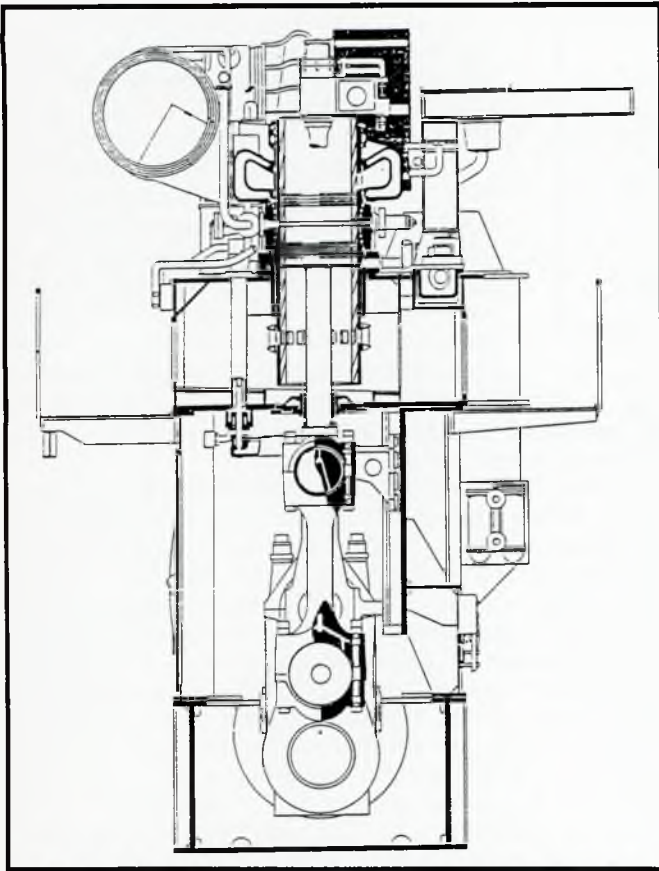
Cross section of 58JS type engine indicating reduced cylinder bore
